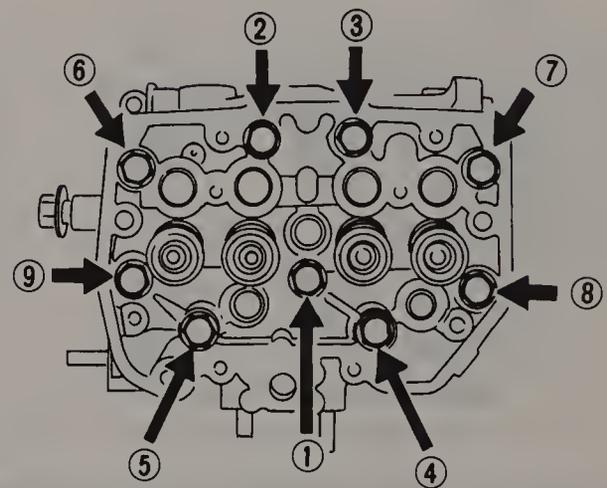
Head bolt tightening sequence (Sec 5)
